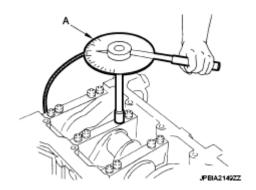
Checking Main Bearing Cap Bolts Tightening Angle Using Angle Wrench Courtesy of NISSAN MOTOR CO., U.S.A.
